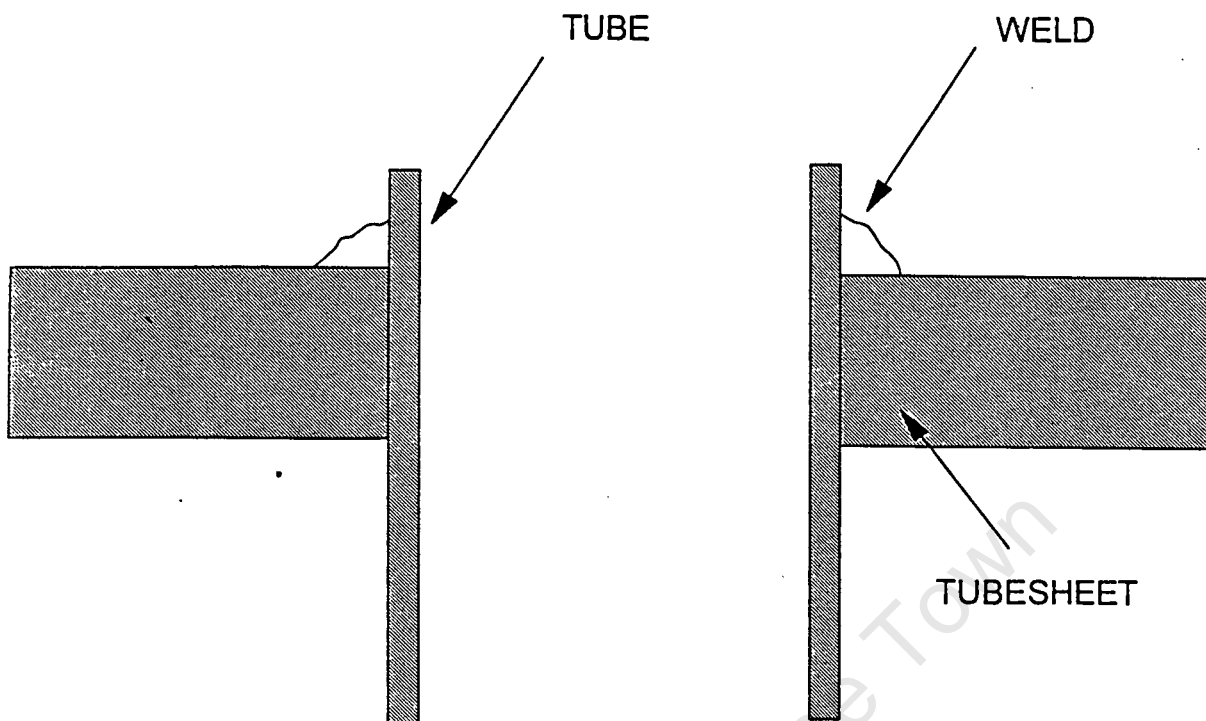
Weld configuration between the tubes and the tube sheet.
